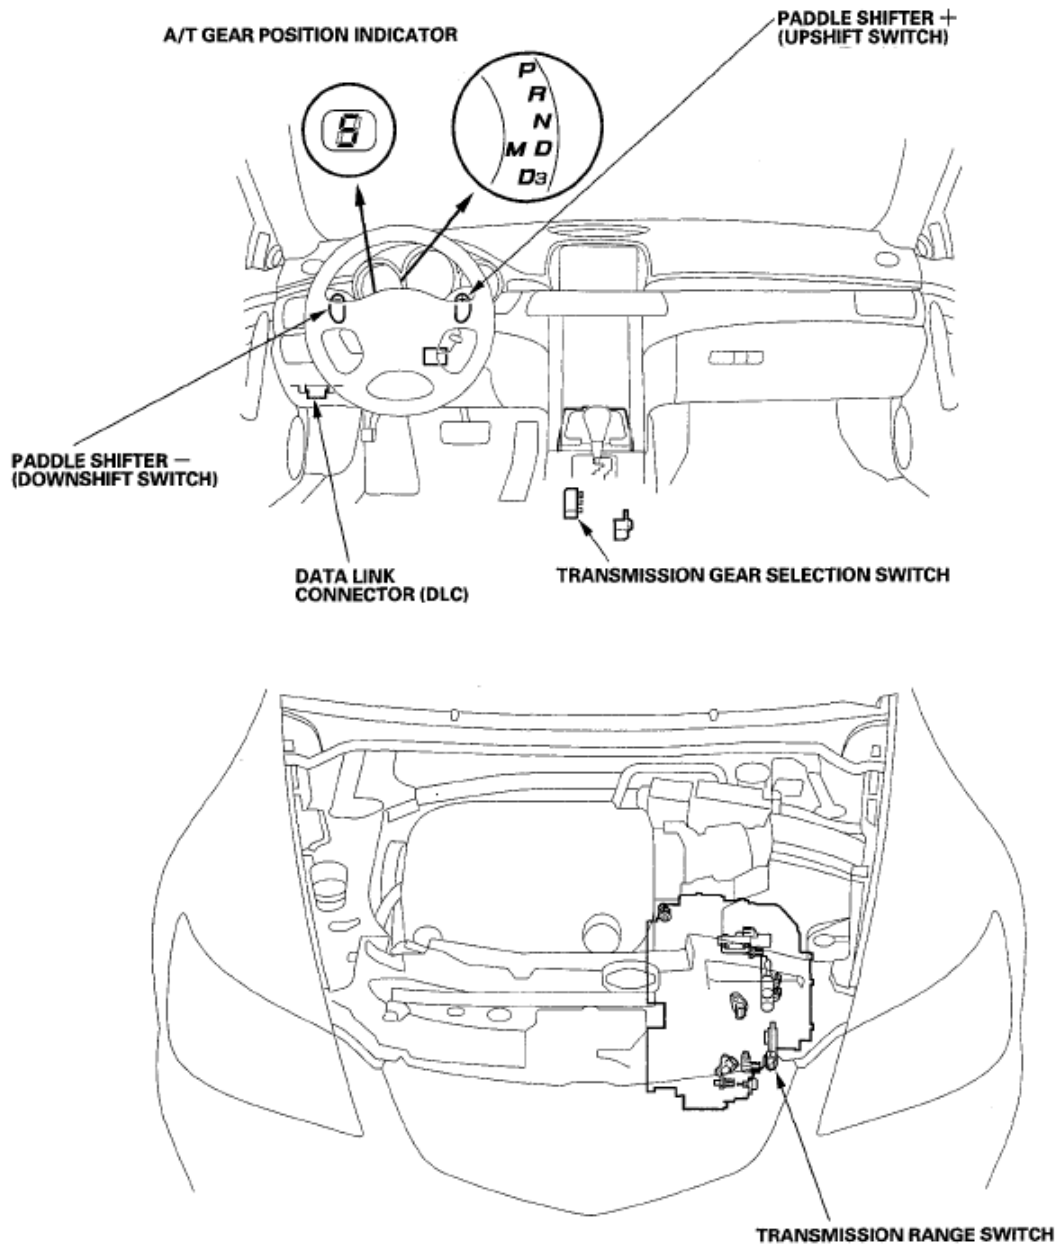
Identifying A/T Gear Position Indicator Component Location
